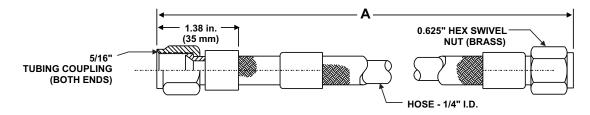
Flexible Actuation Hose Table 2-14. Dimensions, Flexible Actuation Hose
